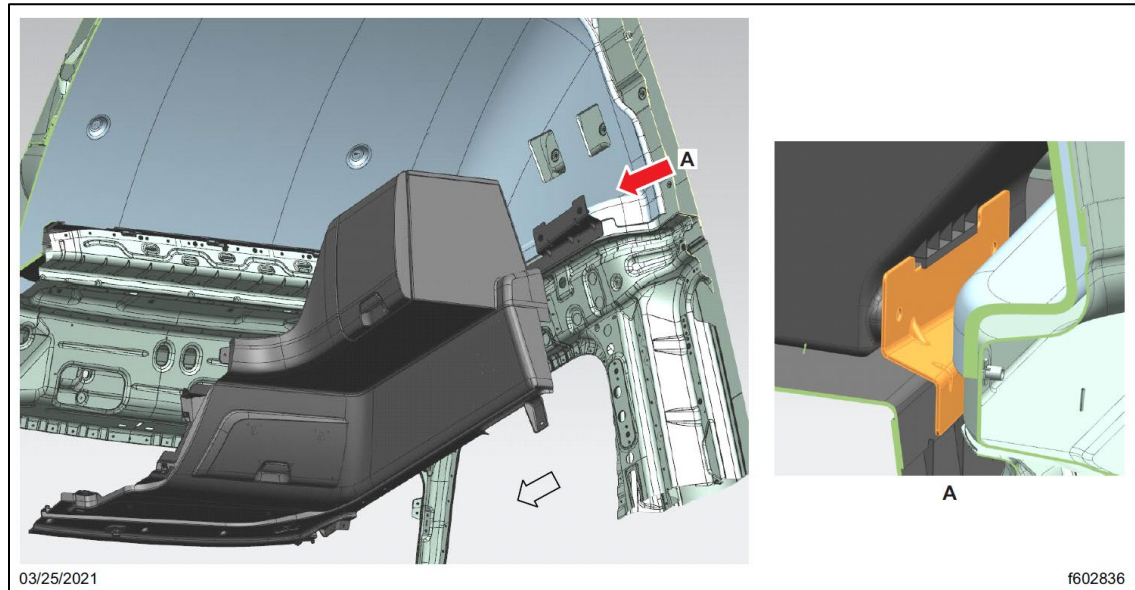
, RH Overhead Storage Assembly Hung on the Sidewall Bracket
